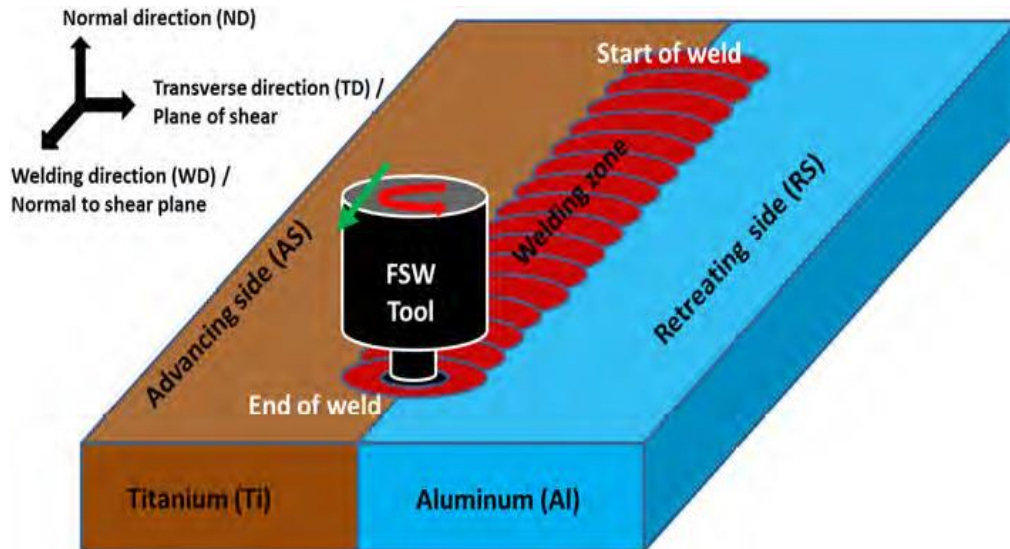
Schematic of the friction stir welding process (a) Friction stir butt-welding [12]
